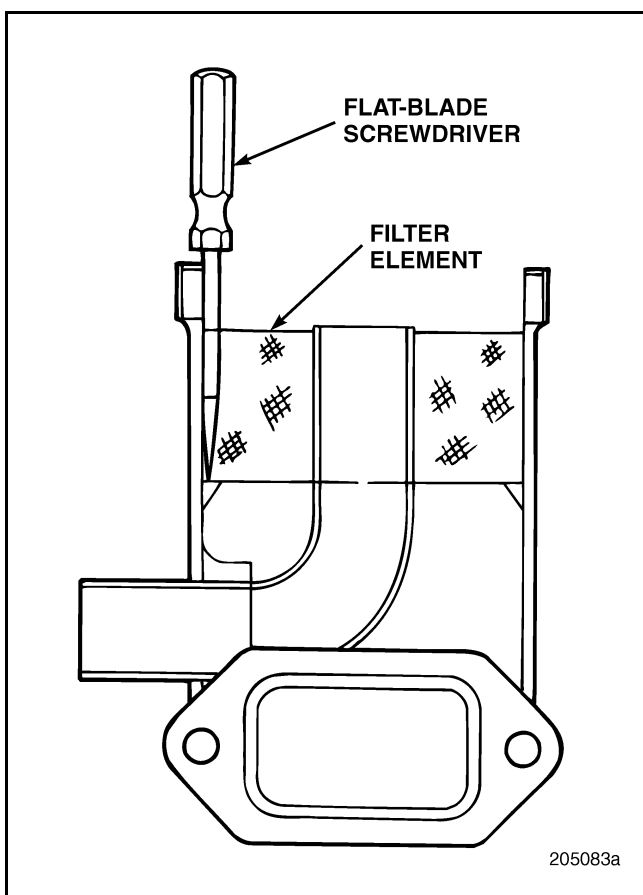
Breather Filter Element Removal (Cast Aluminum Housing Shown)
